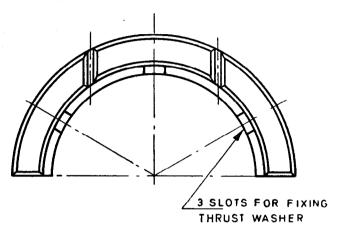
CLIP-ON TYPE FLANGE BEARING DESIGN
